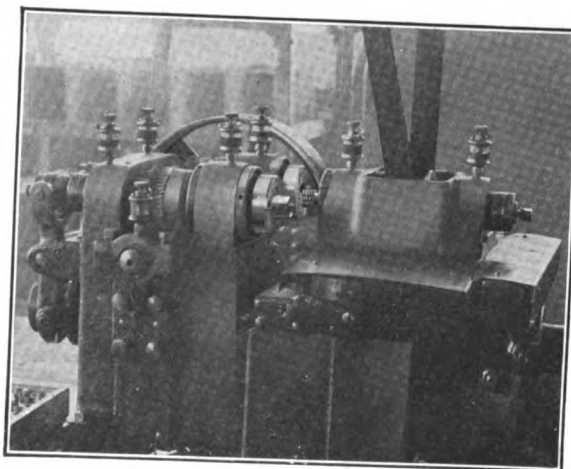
BODY OPERATION 3: MILLING THREAD ON PRIMER BODY
